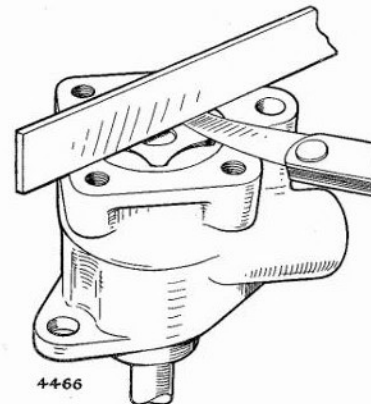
Checking end float of the oil pump rotor and ring, using a feeler gauge and straight edge.
